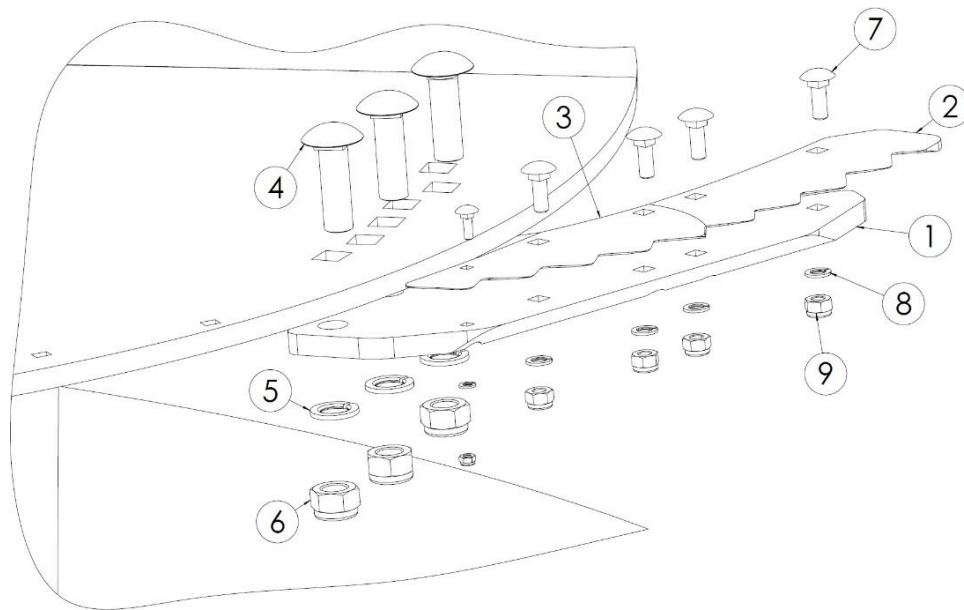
Cutting blade replacement: 1 - blade base, 2 - cutting knife I, 3- cutting knife II, 4 and 7 - jack screw, 5 and 8 - washer, 6 and 9 - self-locking nut
